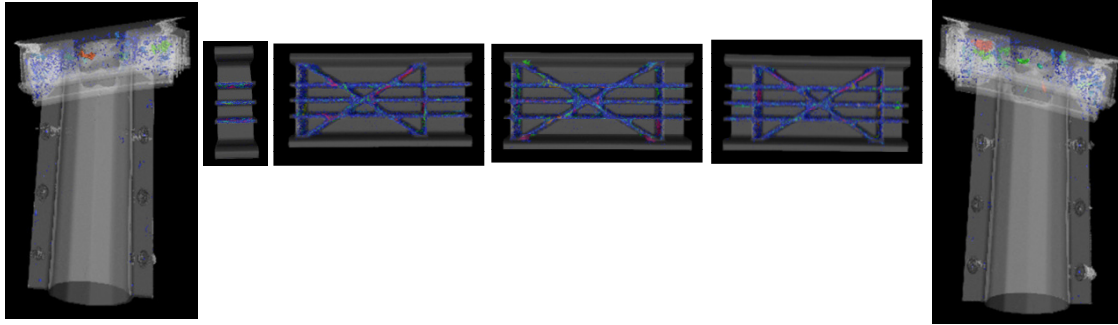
CT of FB-CC assembly. This is super position of the outer surface and a porosity analysis.
